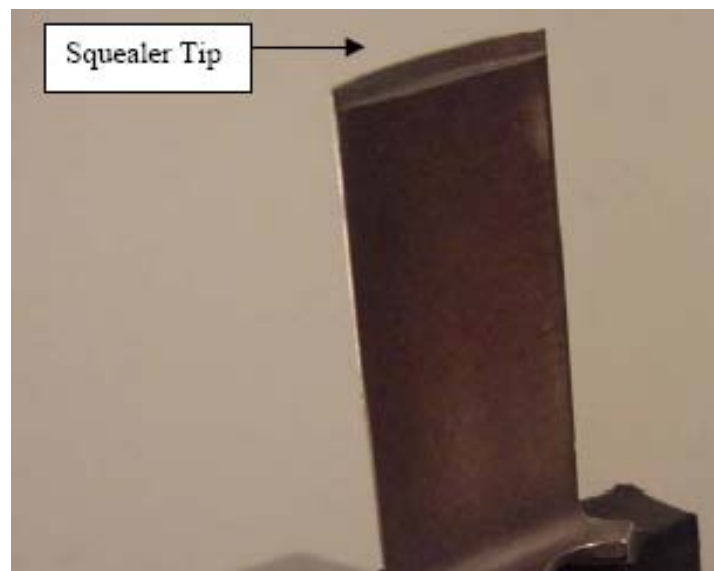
Axial Flow Compressor rotor blade with squealer tip
